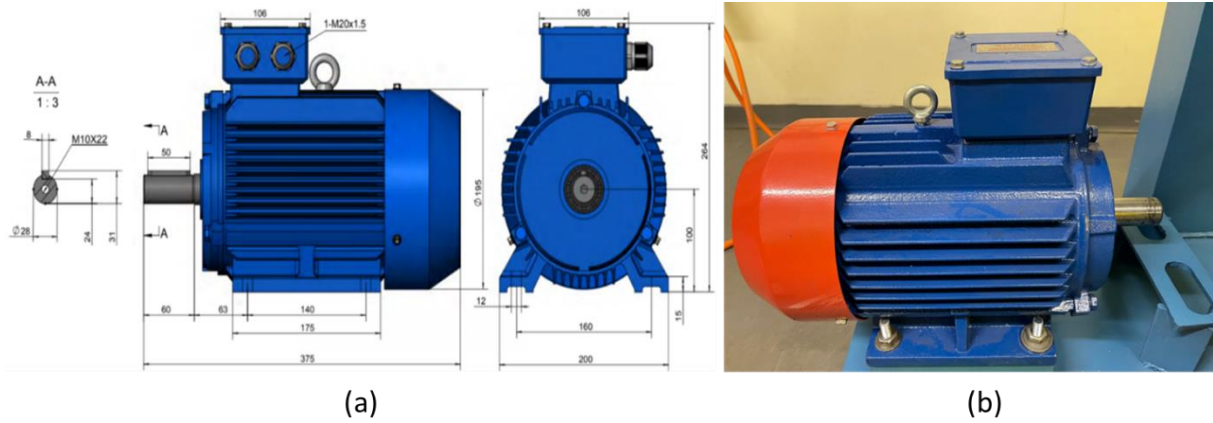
(a) A CAD drawing of the motors showing their dimensions (mm) and (b) a photograph of one of the motors used to make the rig.
